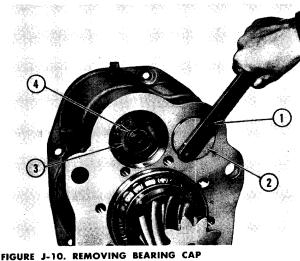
REMOVING BEARING CAP 1. Wrench 3. Setscrew 2. Bearing Cap 4. Locknut
